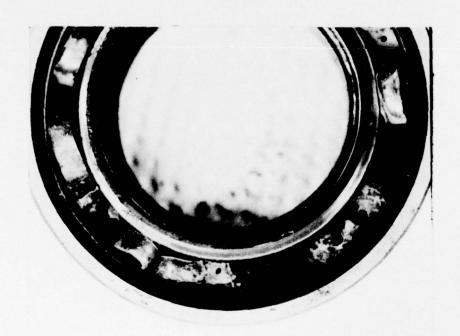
Bearing S/N TRL-19. 2.5x Enlarged View.
